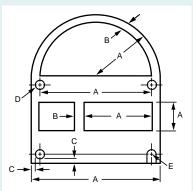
PORCUPINE METALASTIC Die-Cut Gaskets (fully dimensioned drawings required)
